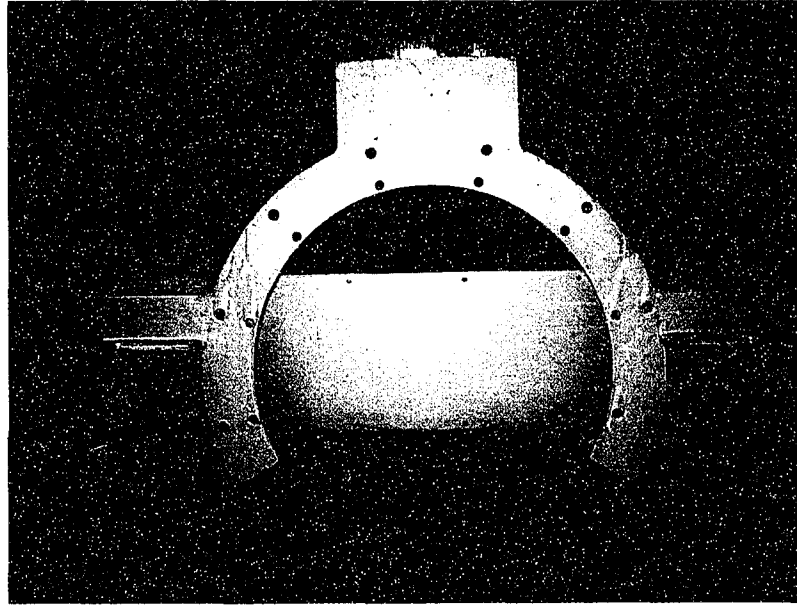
Typical Engine Rear Mounting Plate Used to Mount the Engine on the Dynamometer Test Sled
